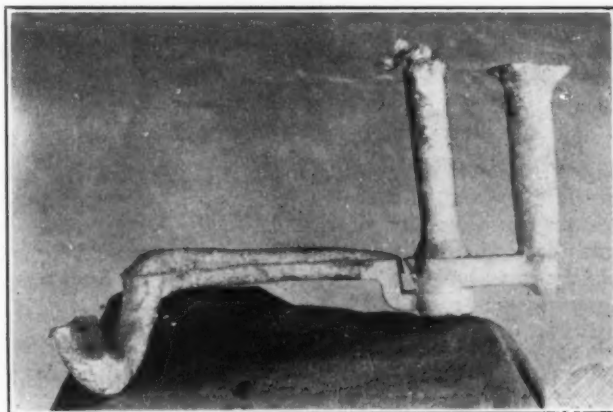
Skim gate with horn sprue after cutting from casting.
